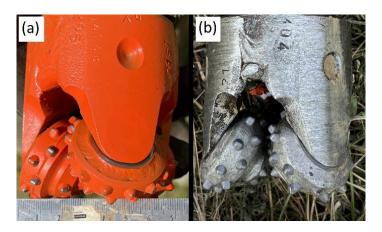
2.8-in. diameter tricone carbide drill bit used in the experimental campaigns (a) before and (b) after tests — no significant wear.
